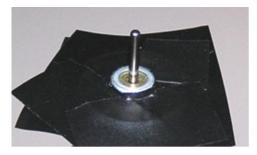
Tape Wrapping Process for the "Shaft" End of a Motor
